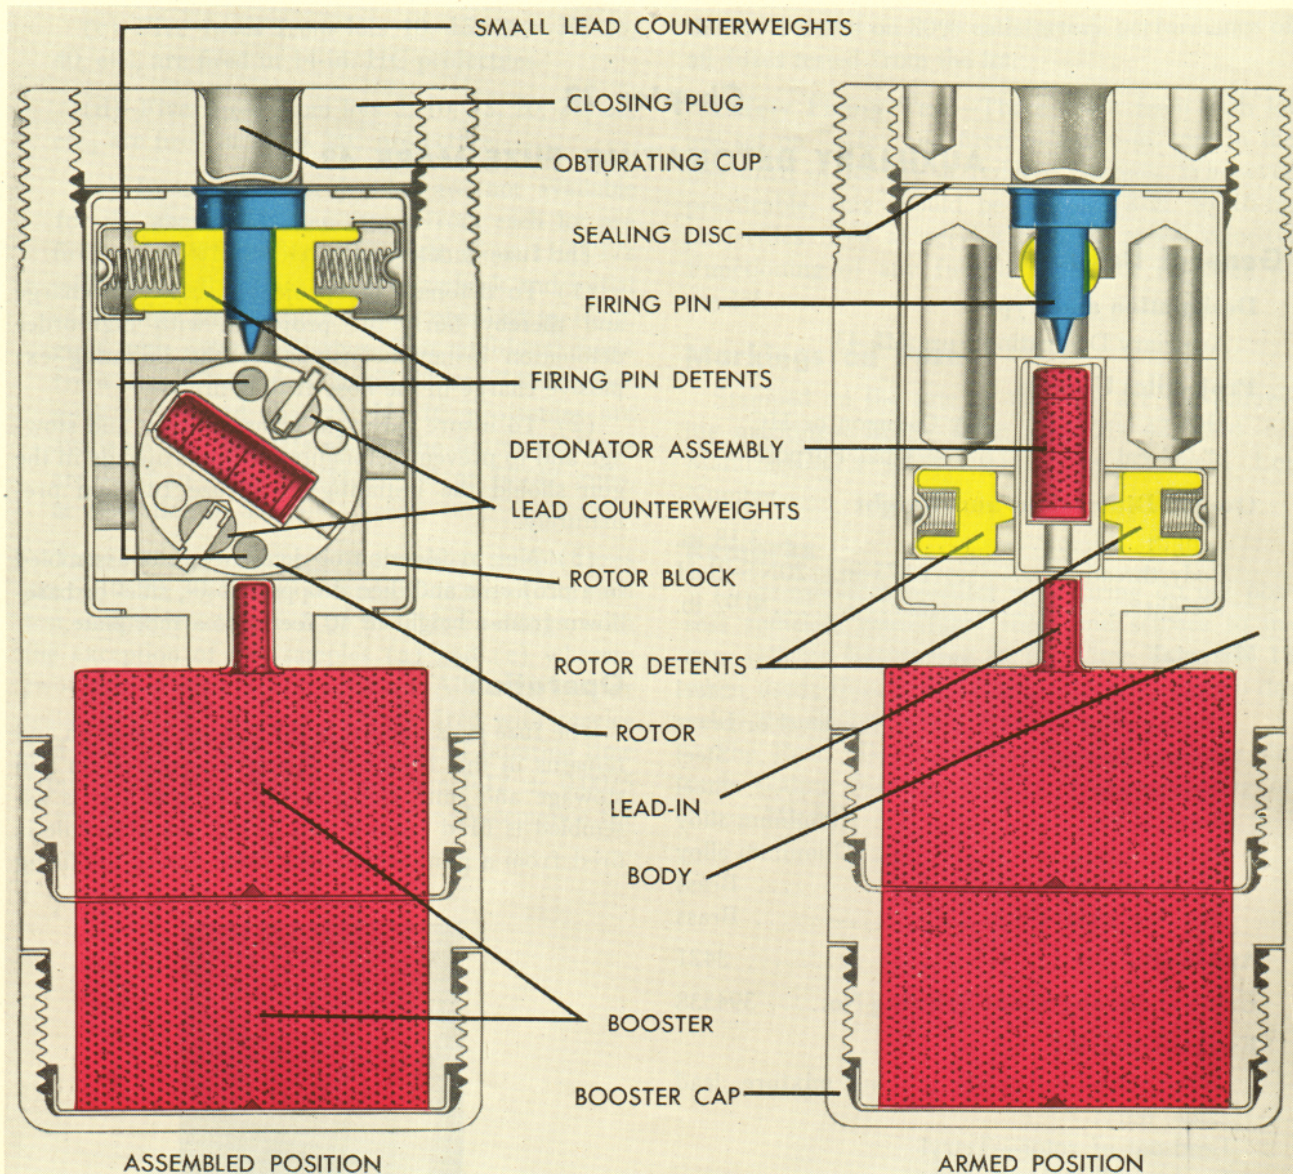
Auxiliary Detonating Fuze Mk 43 Mod 1—Sectional View
